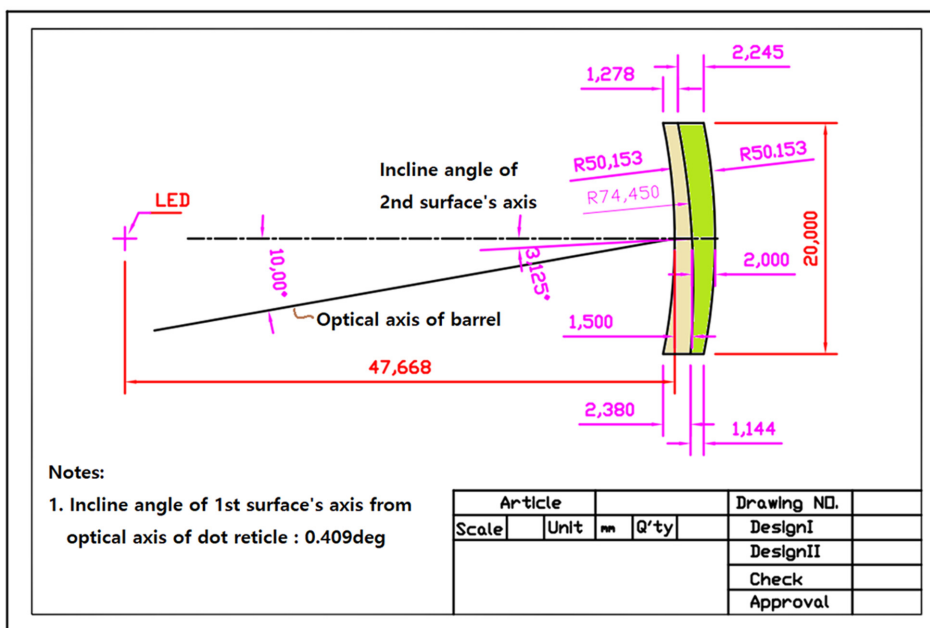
Fabrication drawing of the new doublet reflector designed with wedge-shaped lenses.
